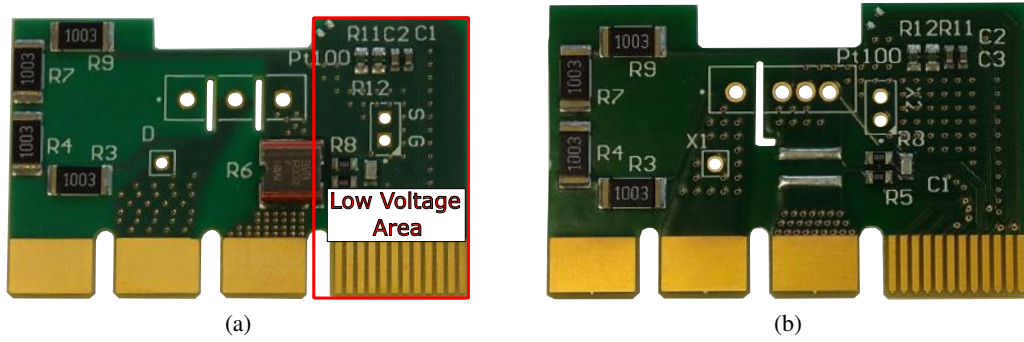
DUT boards: (a) front side of a 3-pin TO-247 device, (b) front side of a 4-pin TO-247 device.
